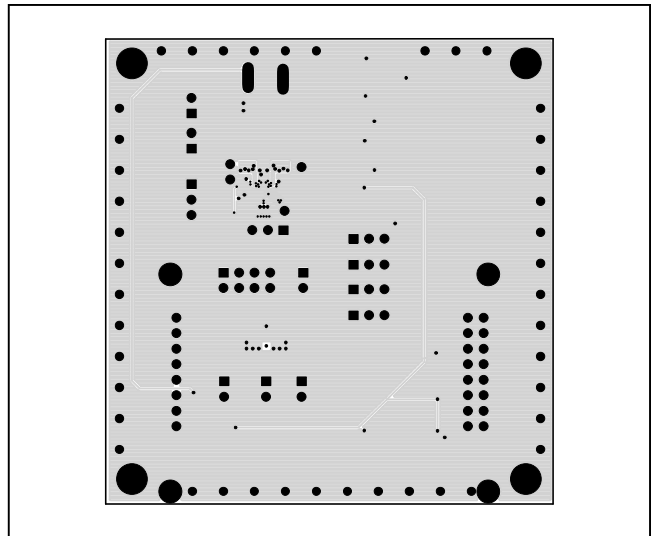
MAX77387 EV Kit PCB Layout—Inner Layer 3
